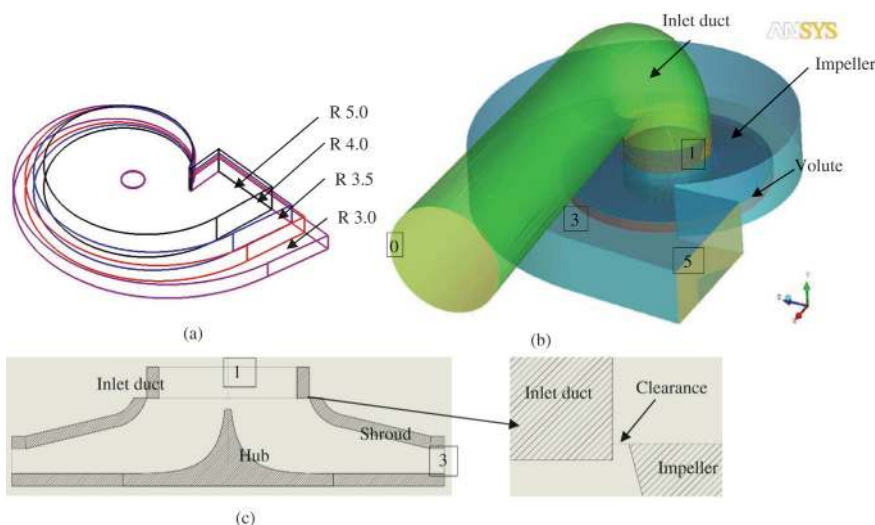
(a) 3-D View of R 3.0, R 3.5, R 4.0 and R 5.0 volutes (b) 3-D view of fan assembly for R 5.0 volute with clearance of τ_1 (1 mm) (c) Meridional view of impeller.
